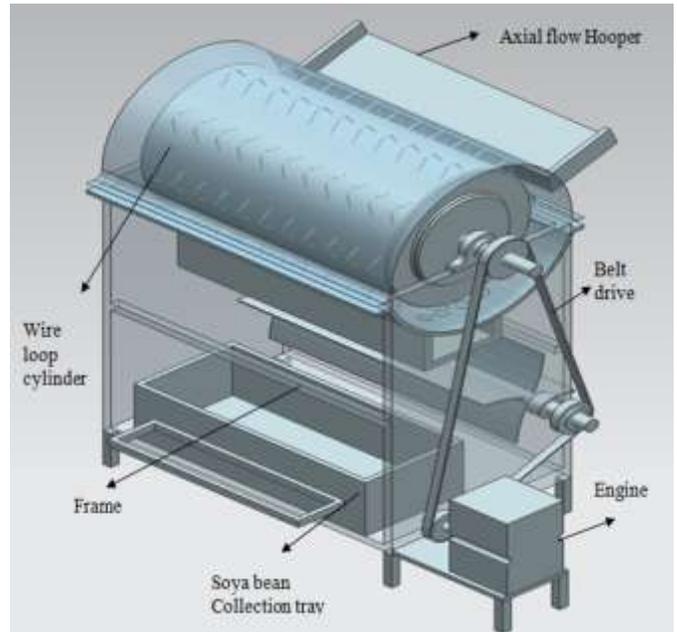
Axial flow, Hold on type, wire Loop tooth cylinder soybean threshing machine
